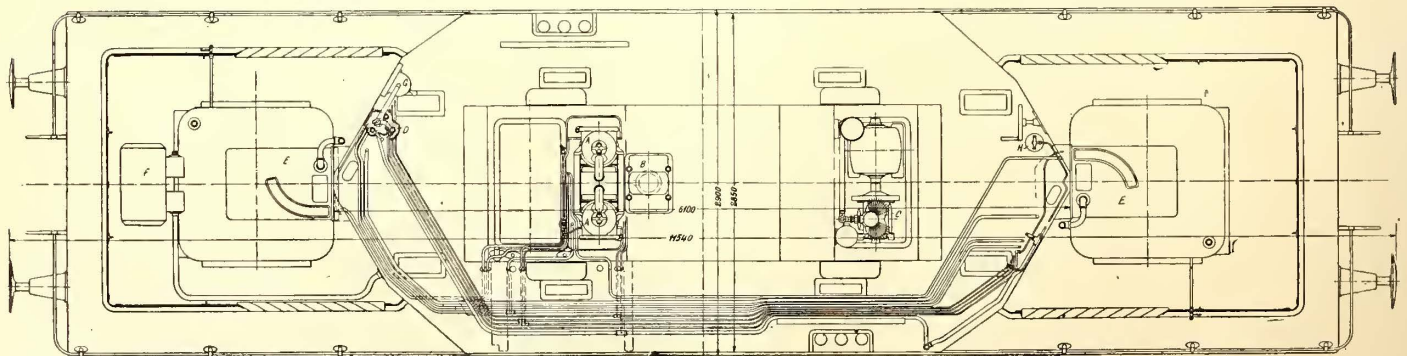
FLOOR PLAN OF LOCOMOTIVE, SHOWING ARRANGEMENT OF APPARATUS
